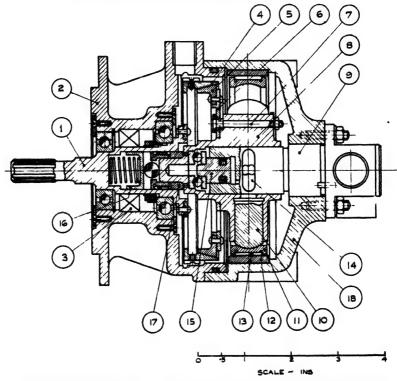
A High Pressure Hydraulic Pump used to Illustrate the Tolerance Setting Procedure
